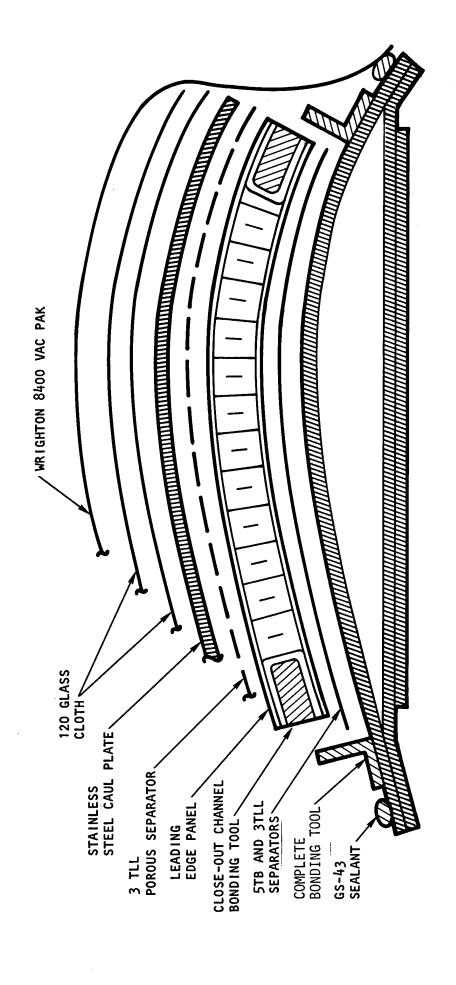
Leading Edge Bonding Assembly-Cross Sectional View
